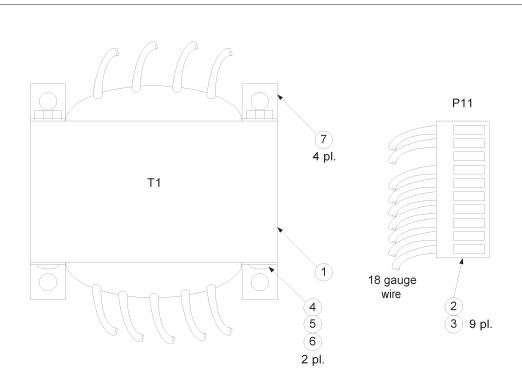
TRANSFORMER ASSEMBLY EXPLODED VIEW
